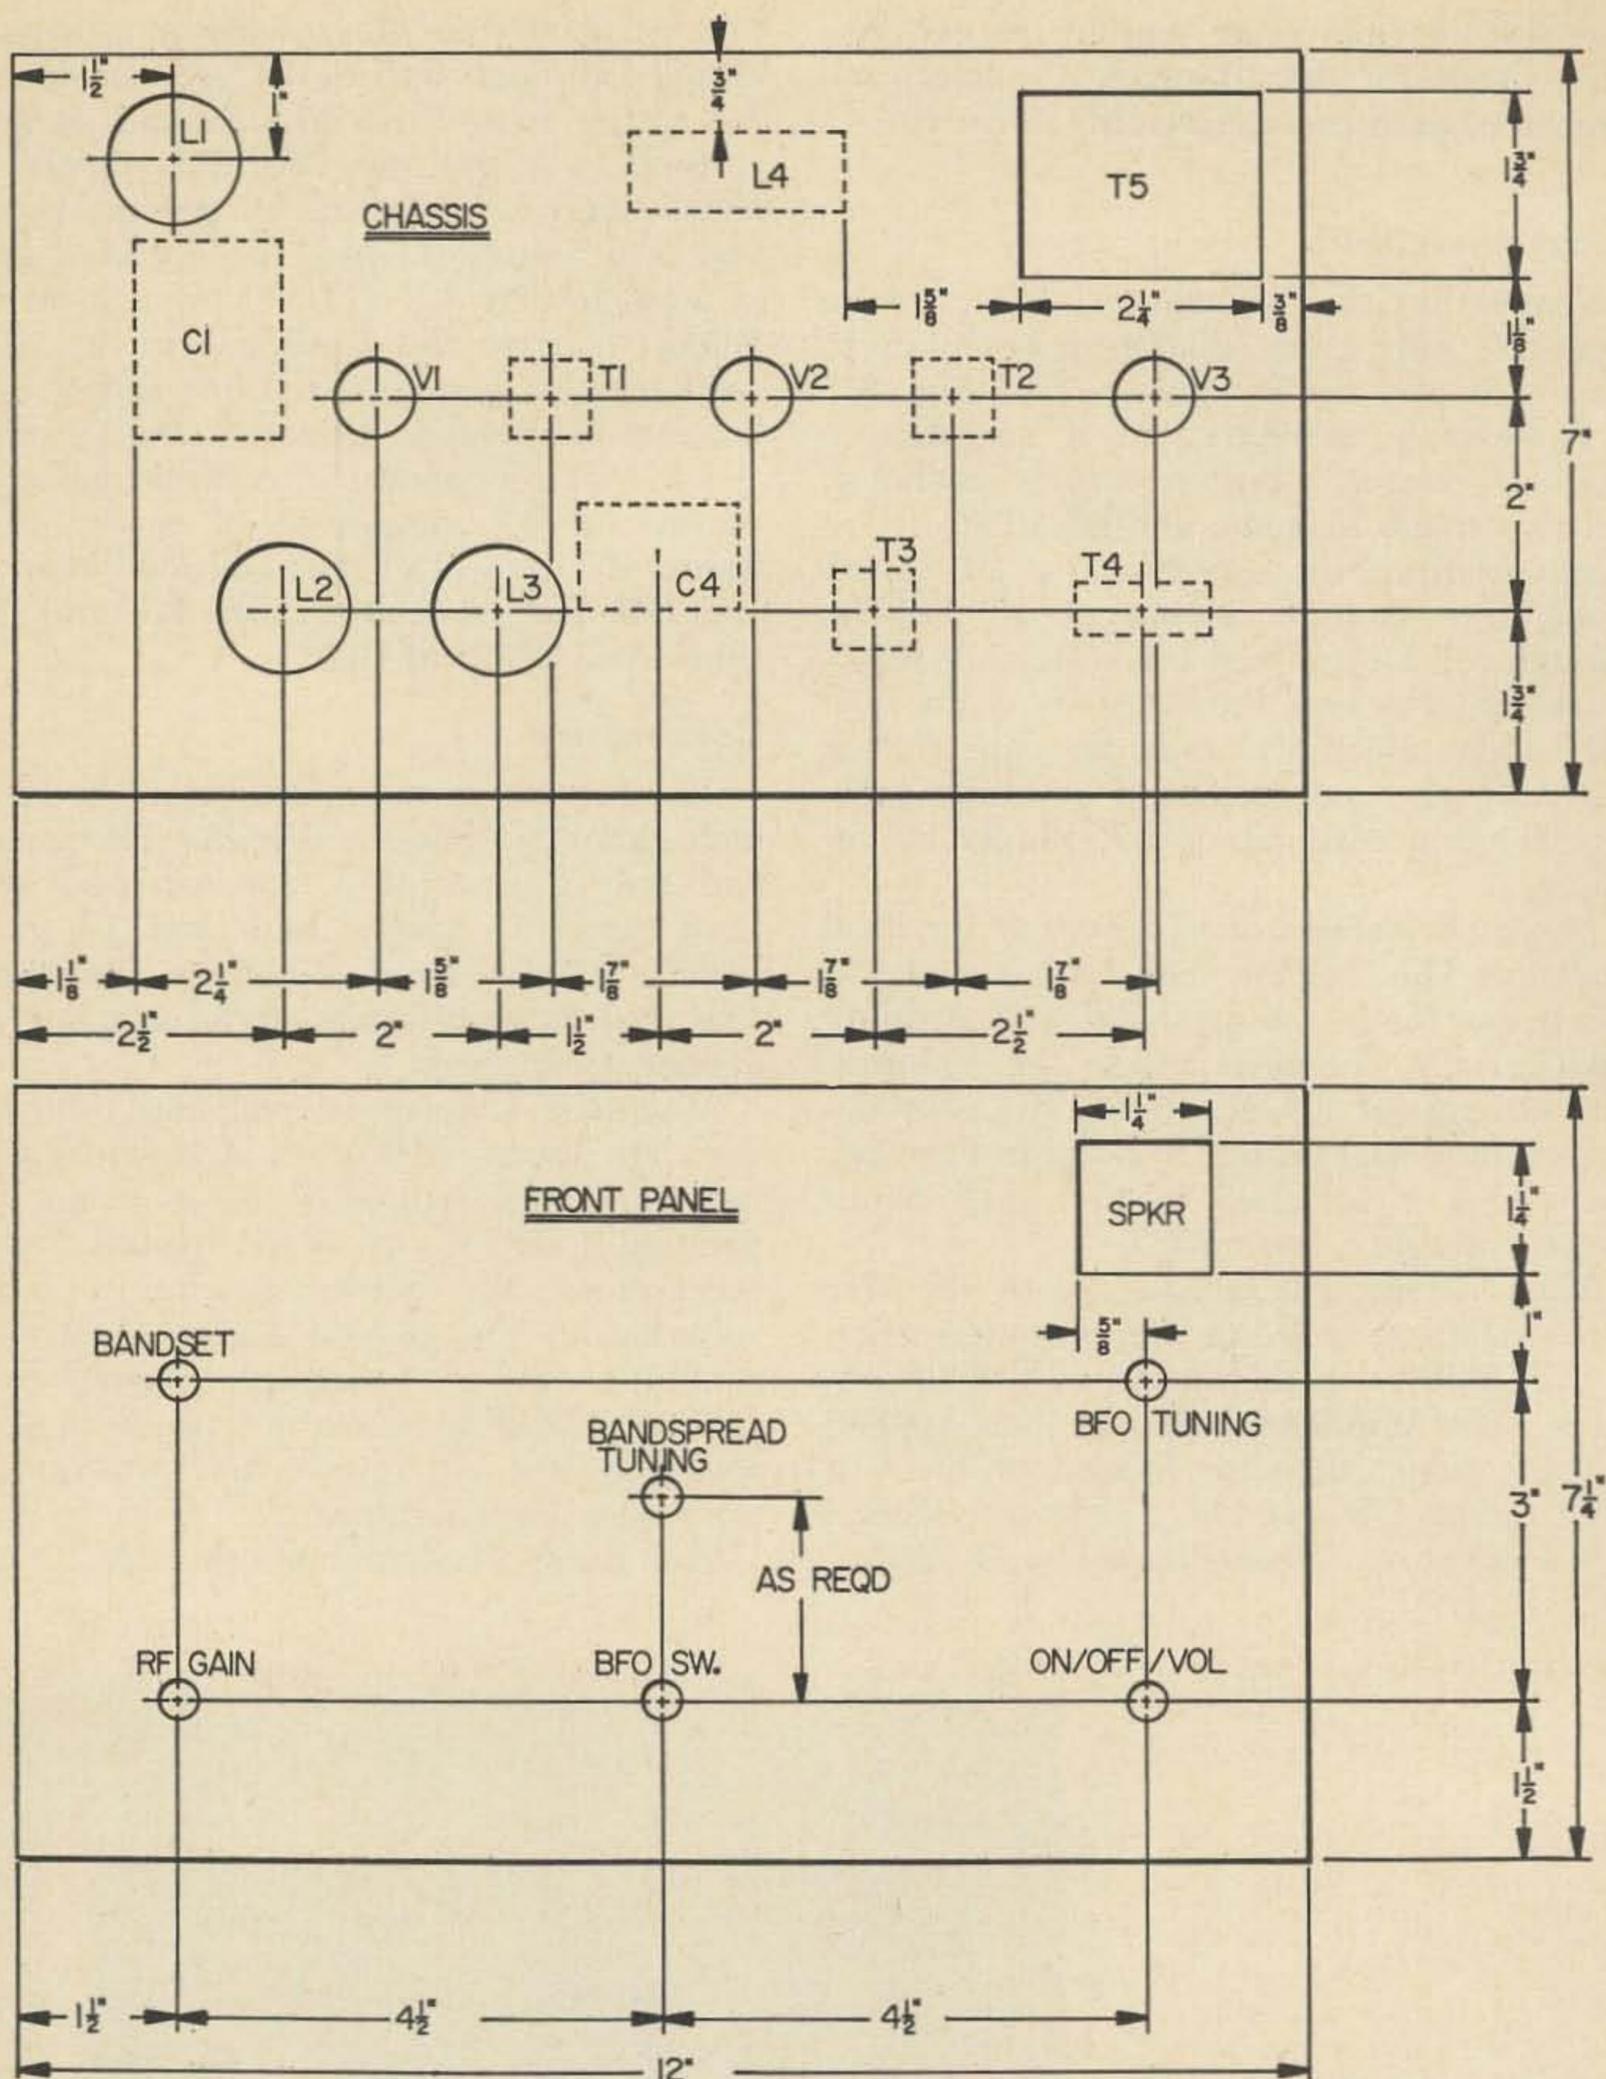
Mounting dimensions, hole sizes and general chassis layout.
